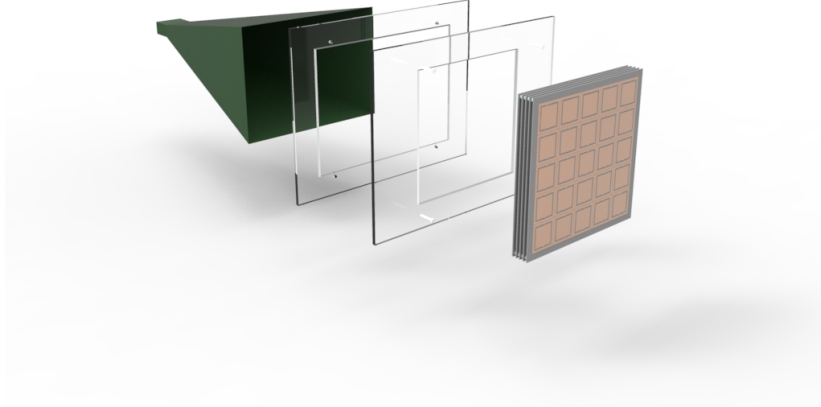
Exploded-view of the *Perspex* mount.
